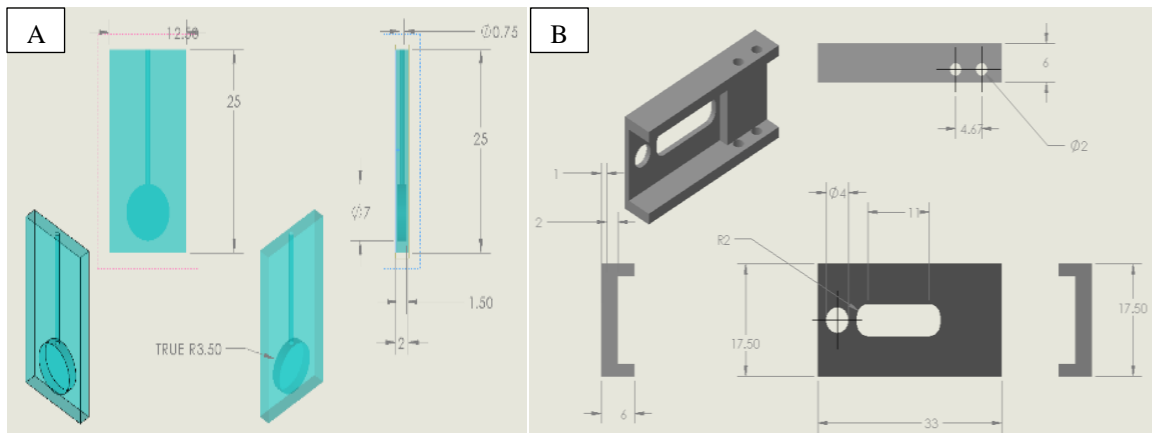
SolidWorks™ designs of two main parts of the hydraulic sensor showing different views of the designs A) bulb and fluid capillary sensor; B) lever part of the sensor with one end which attaches to the plate, and a second end which presses on the bulb with a pressure and displacement which depends on the degree of plate bending. (All measurements are in mm) [Reproduced with the permission from Rajamanthrilage A.C. et al.: “Measuring Orthopedic Plate Strain to Track Bone Healing Using a Fluidic Sensor Read via Plain Radiography”. IEEE Transactions in Biomedical Engineering. (June 2021)].
